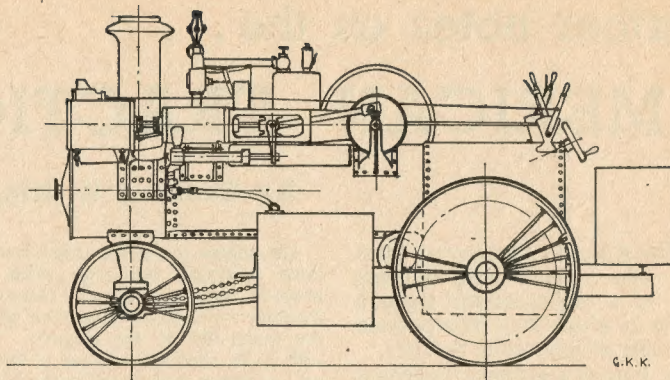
Outline arrangement of the Russell tandem compound engine. Details similar to single-cylinder engine. Circa 1917
